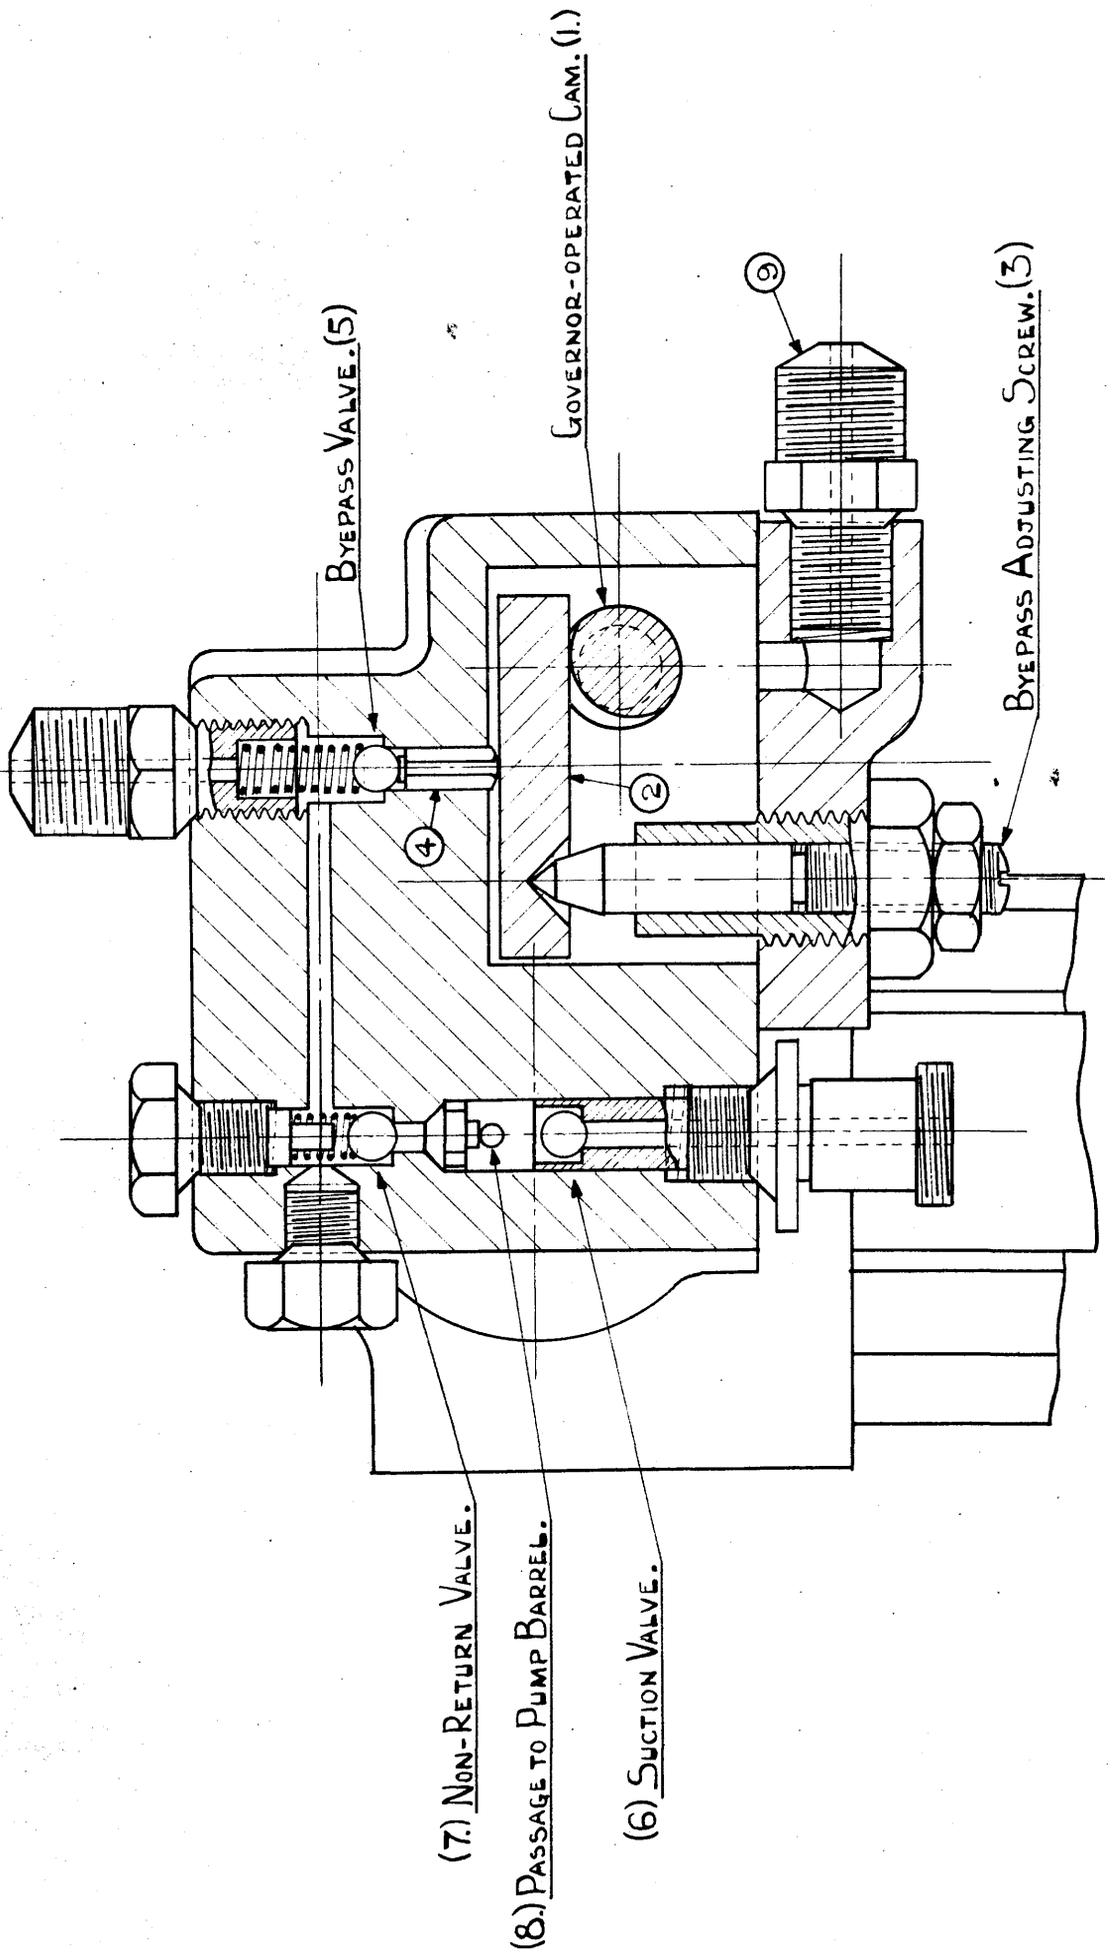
BYE-PASS VALVE MECHANISM. (FULL SIZE.)
